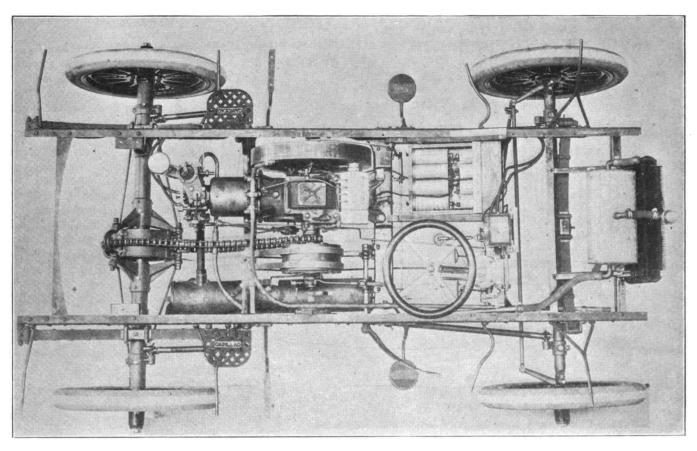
THE CADILLAC SINGLE-CYLINDER CHASSIS FROM ABOVE
